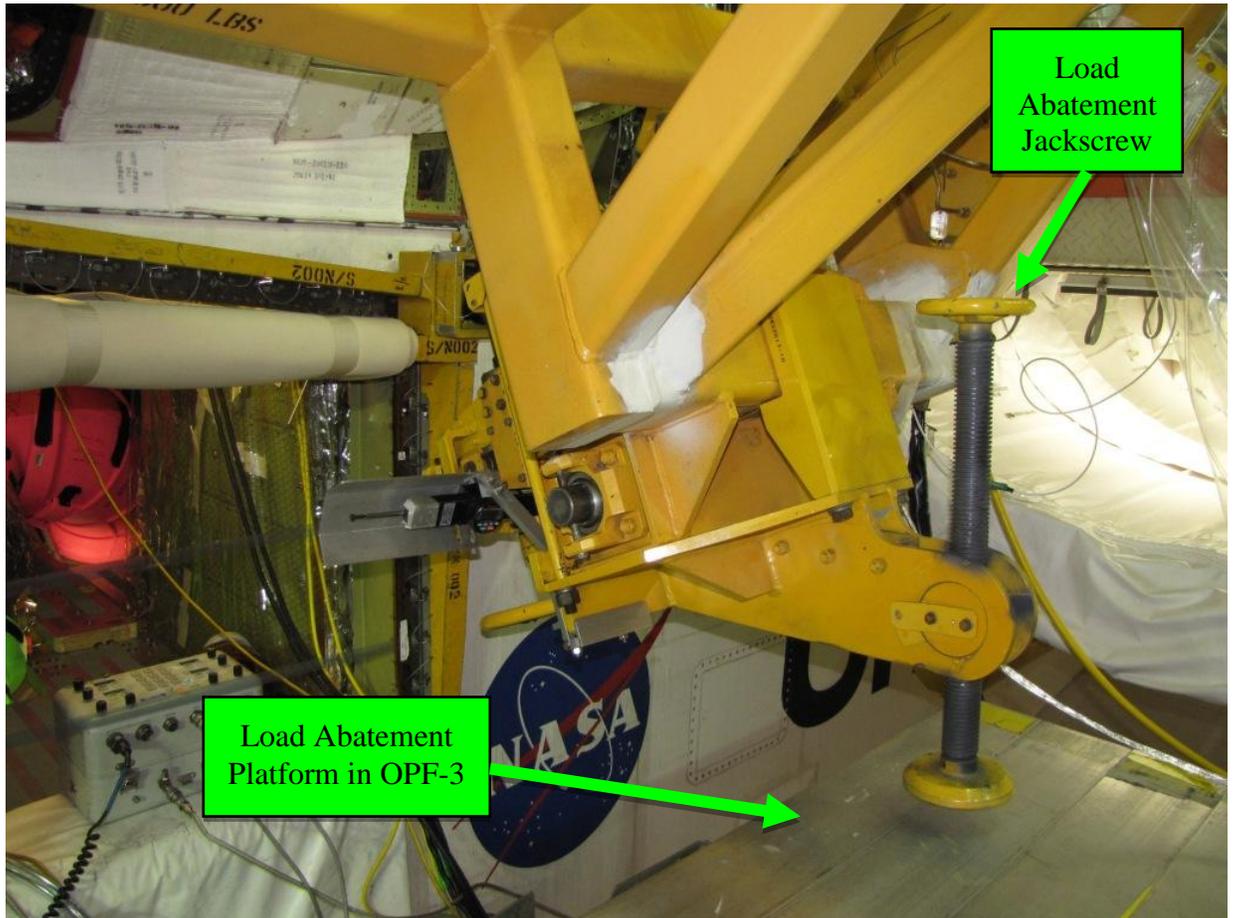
Fwd Adjust Mechanism and Load Abatement Jackscrew and Platform
